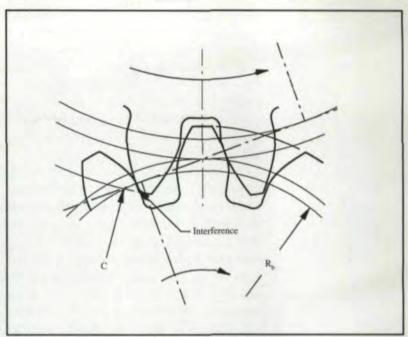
Interference. Courtesy of Van Gerpen and Reece Engineering. complete picture, your designer or manufacturer will need to know something of the application itself. Specifically, he will need to understand the gearbox.
